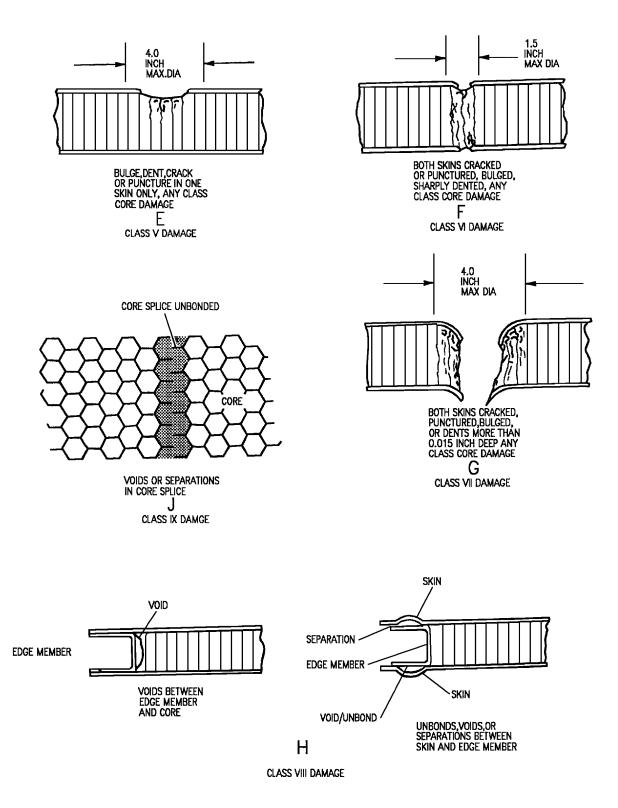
Repairable Damage, Aluminum Skin and Aluminum Honeycomb Core (Sheet 2)
